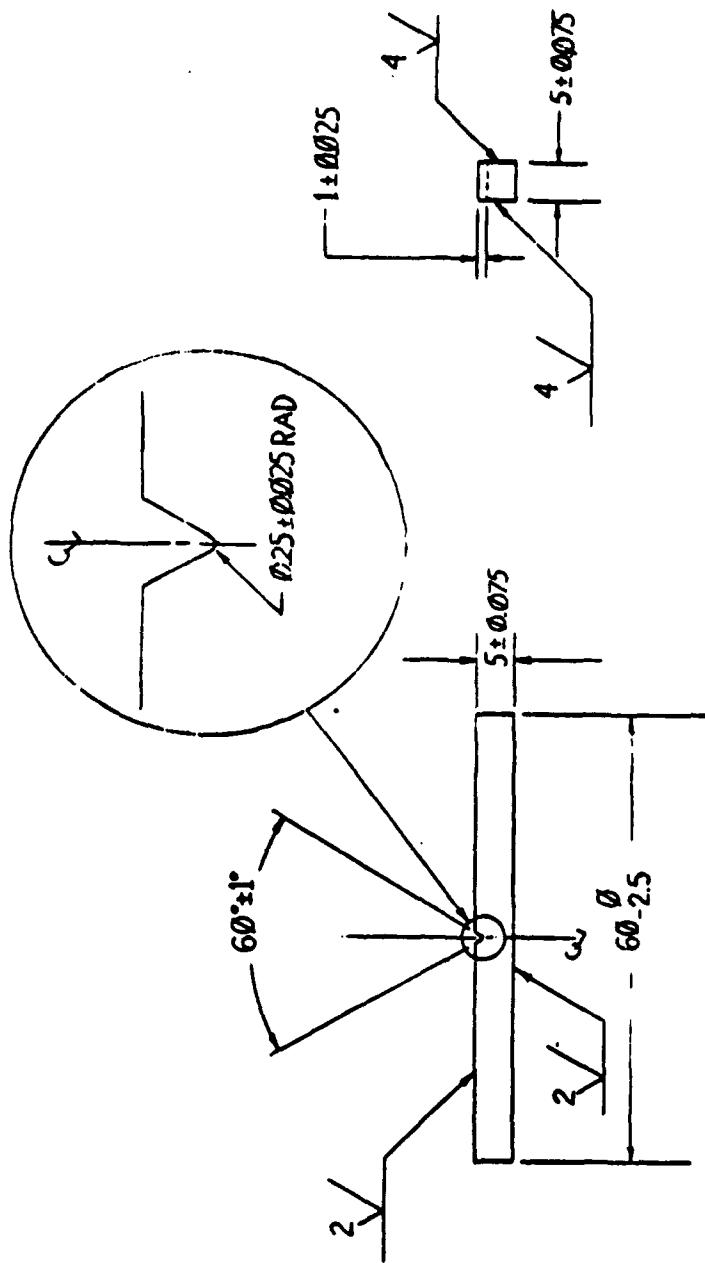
GEOMETRY OF TEST SPECIMEN FOR TENSILE AND FATIGUE TESTING.
